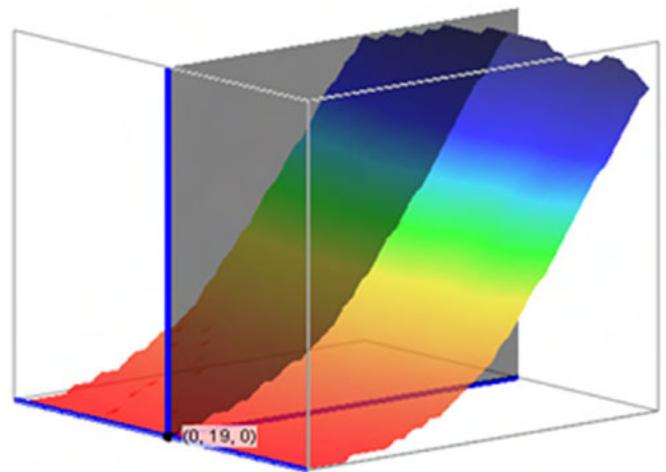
Solder joint reconstruction of the inspection area for a specific y coordinate.
